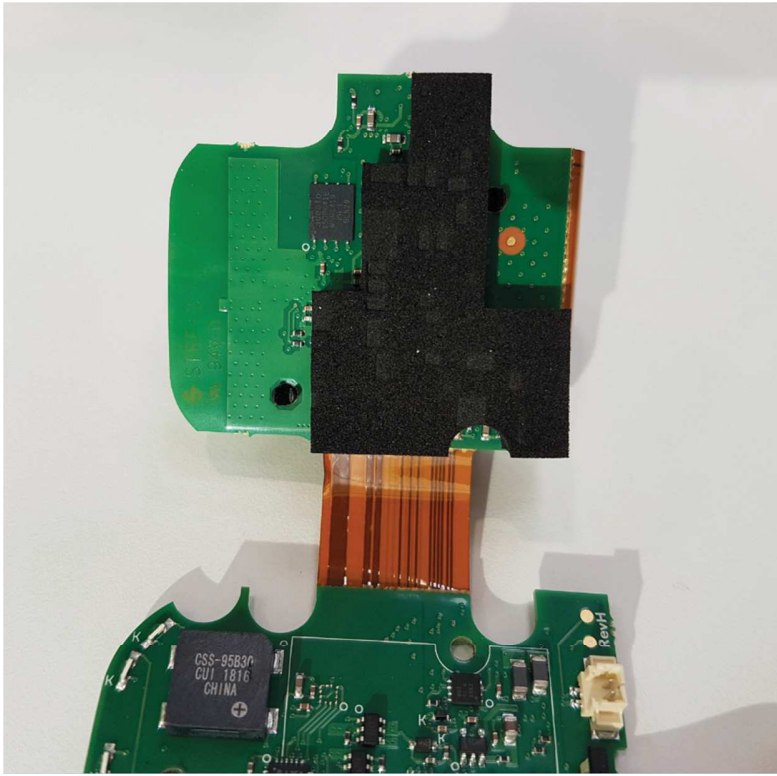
Underside view of flexible PCB of Radio Module removed from main housing
